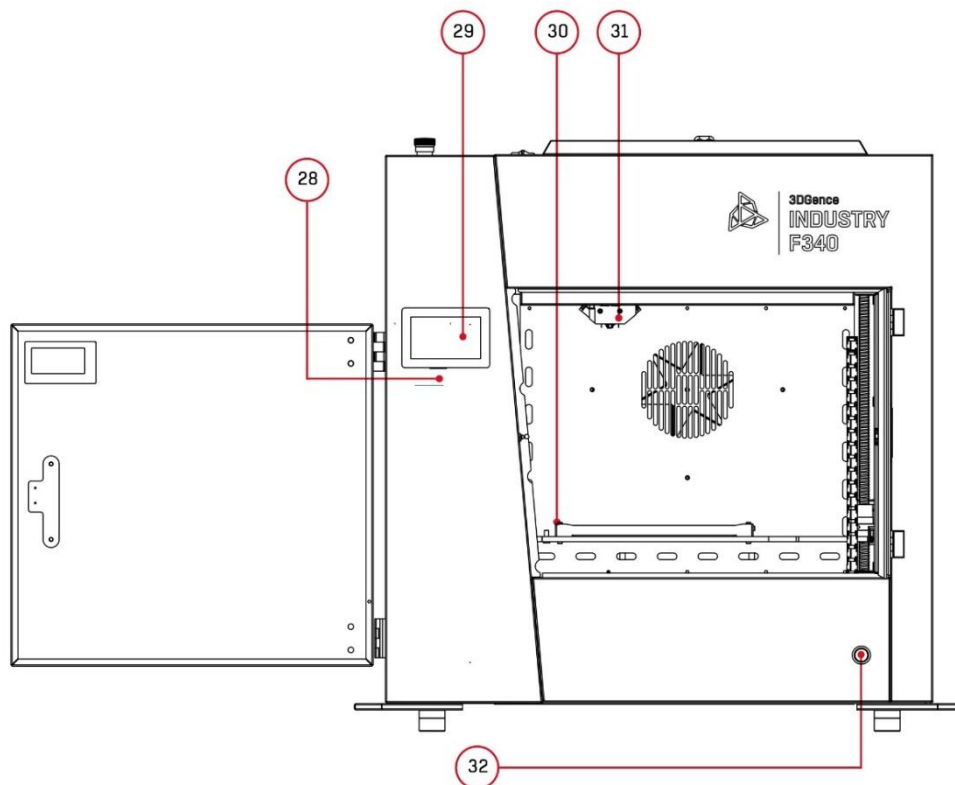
3DGence INDUSTRY F340 printer - front view, open door:
